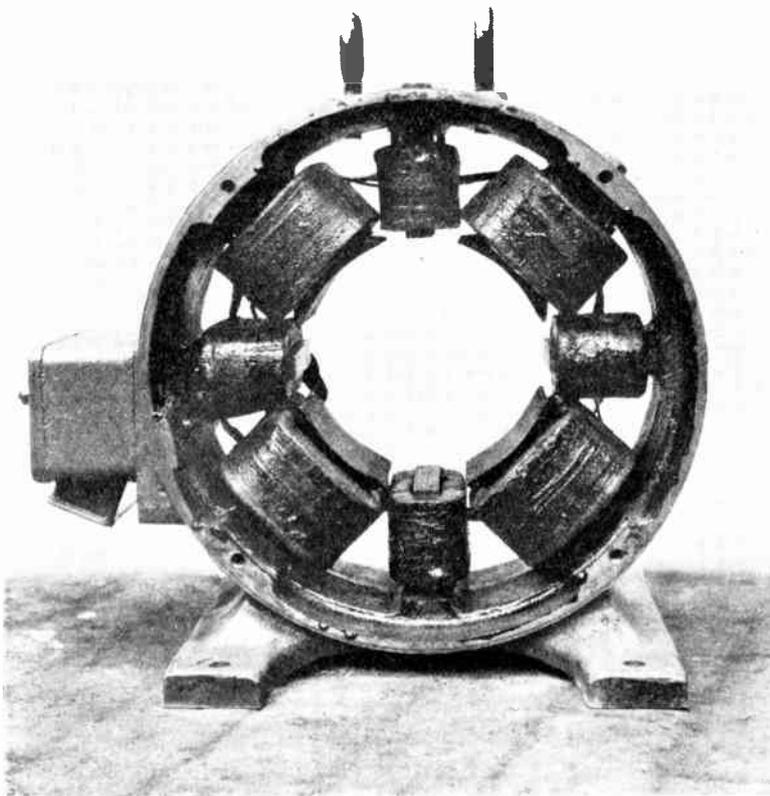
MAGNET FRAME OF MOTOR ILLUSTRATED IN FIG. 1.
